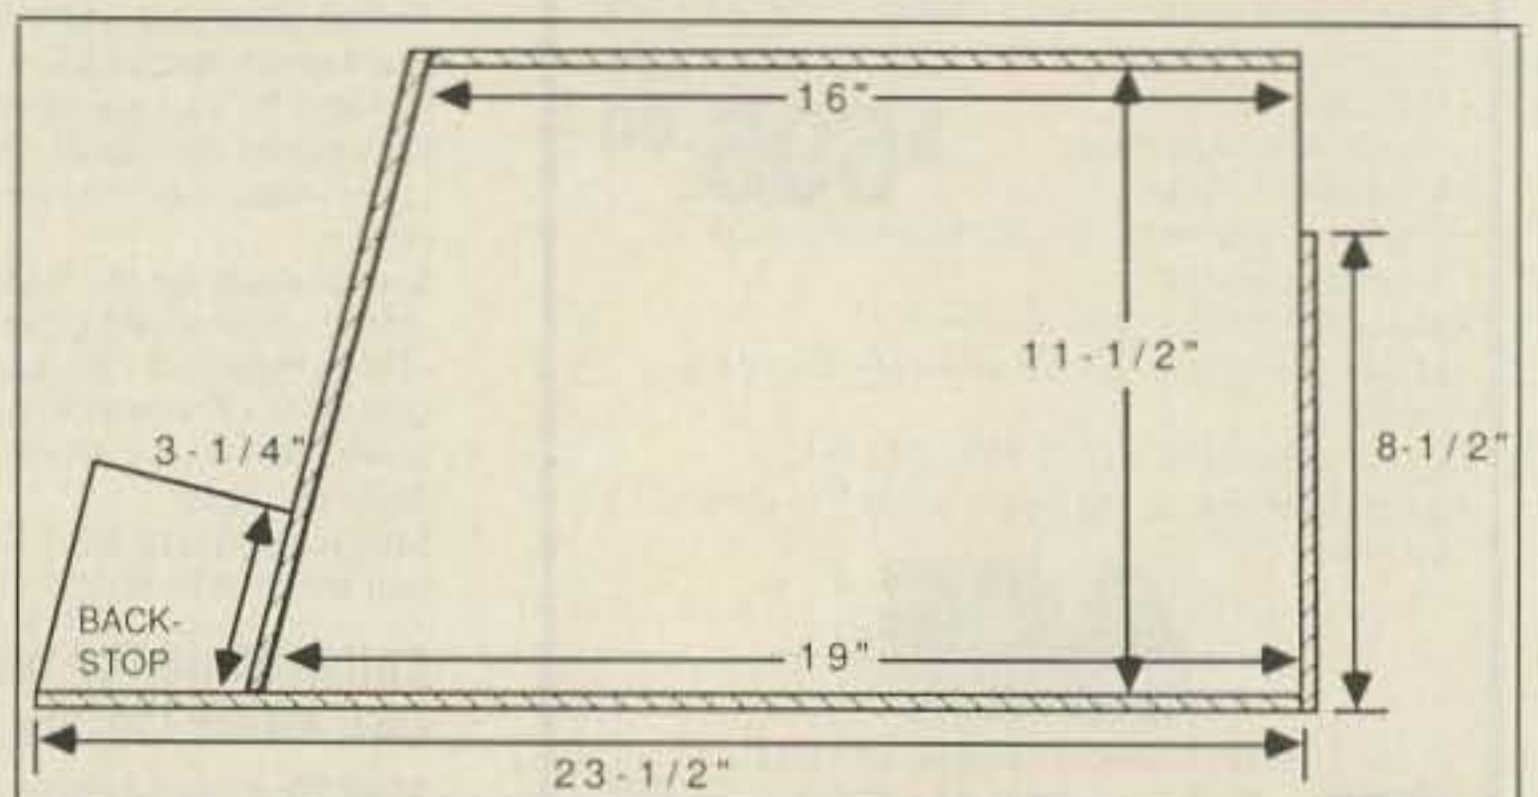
Driver's side view of the console box. Wood screws (#8 X 1½ inches) hold the top, bottom, back, and sloping front into the two trapezoidal pieces.
